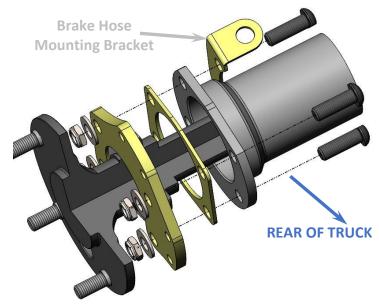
Axle Re-installation w/Primary Caliper Mounting Bracket (DB1572BR LH Side Shown)
